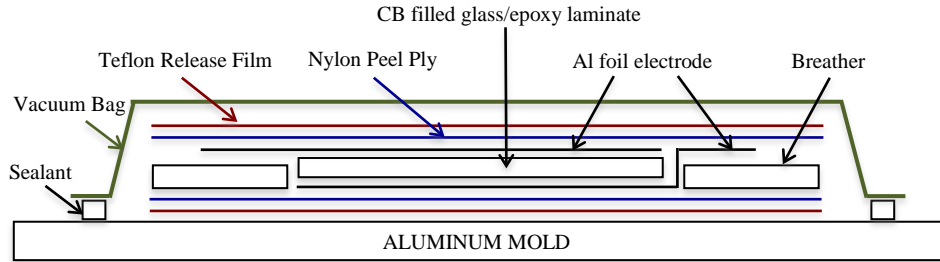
Cross-section view of the vacuum bag for manufacturing CB-filled glass/epoxy composites.
